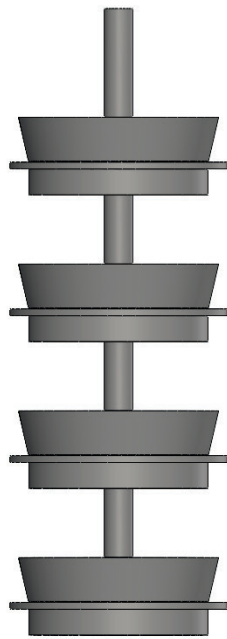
Redesigned wheel geometry developed in SOLIDWORKS: assembly view showing the revised configuration of an additional wheel and extended runner prepared for numerical simulation
